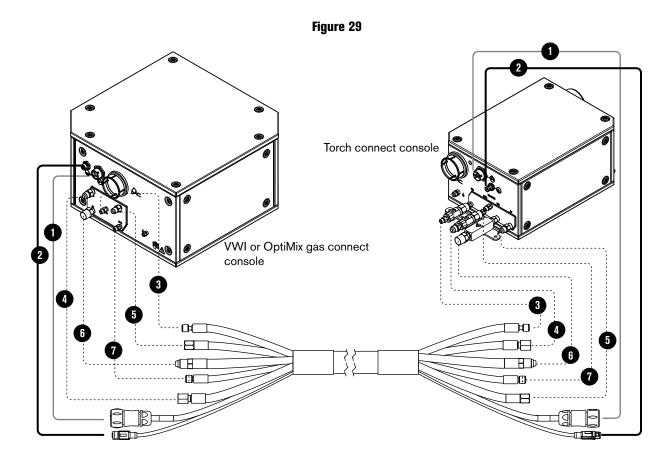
Power cable, CAN cable, and 5-gas hose assembly
